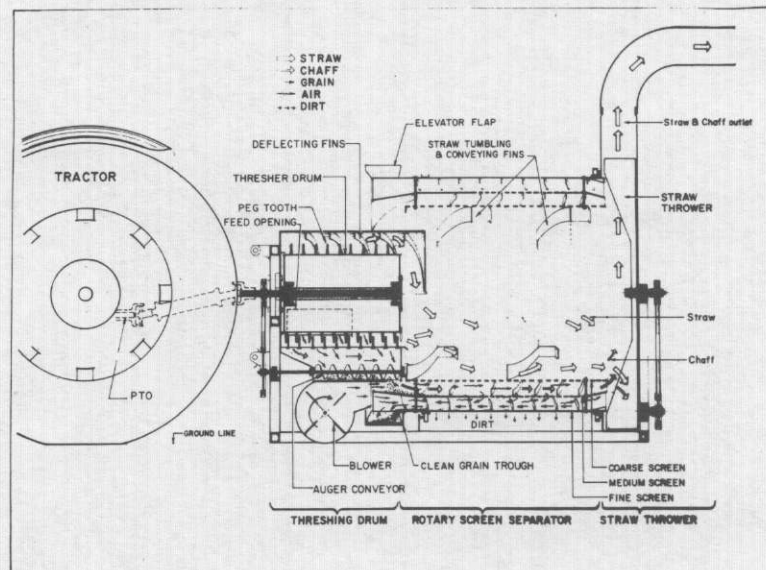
Schematic drawing of the tractor PTO-driven multi-crop thresher.
